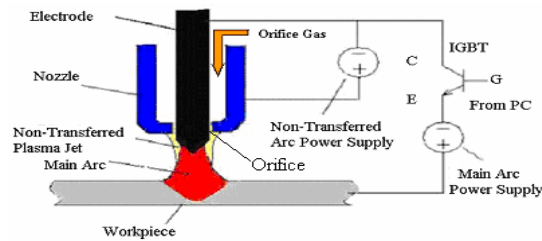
Integrated GTA Welding/Sensing System
